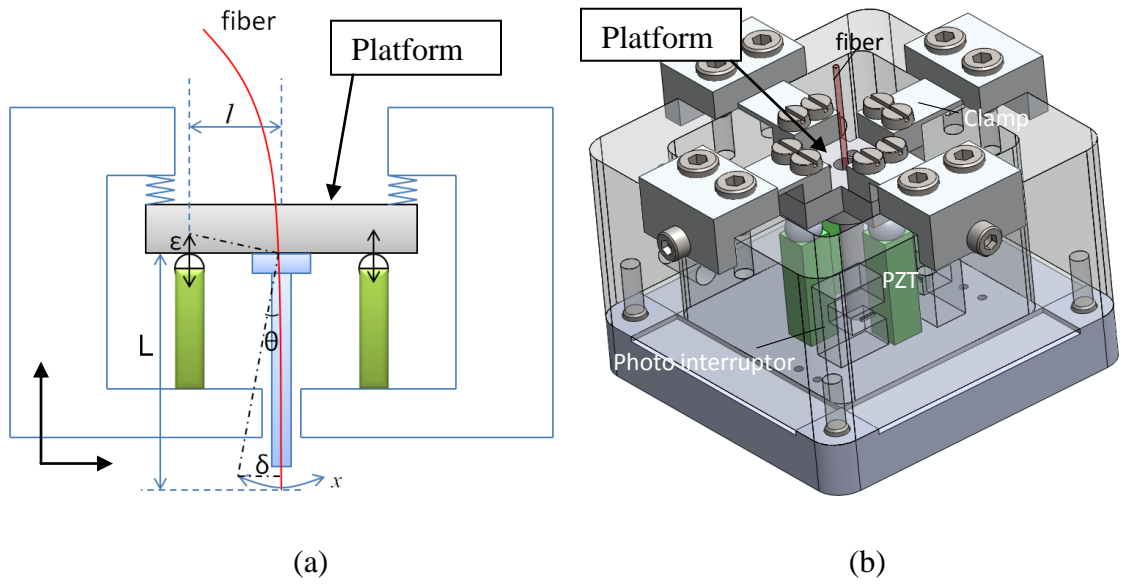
Scanner design, (a) principle of operation  $L = 46\text{mm}$ ,  $l = 10\text{mm}$ , (b) CAD model of the fast scanner.
